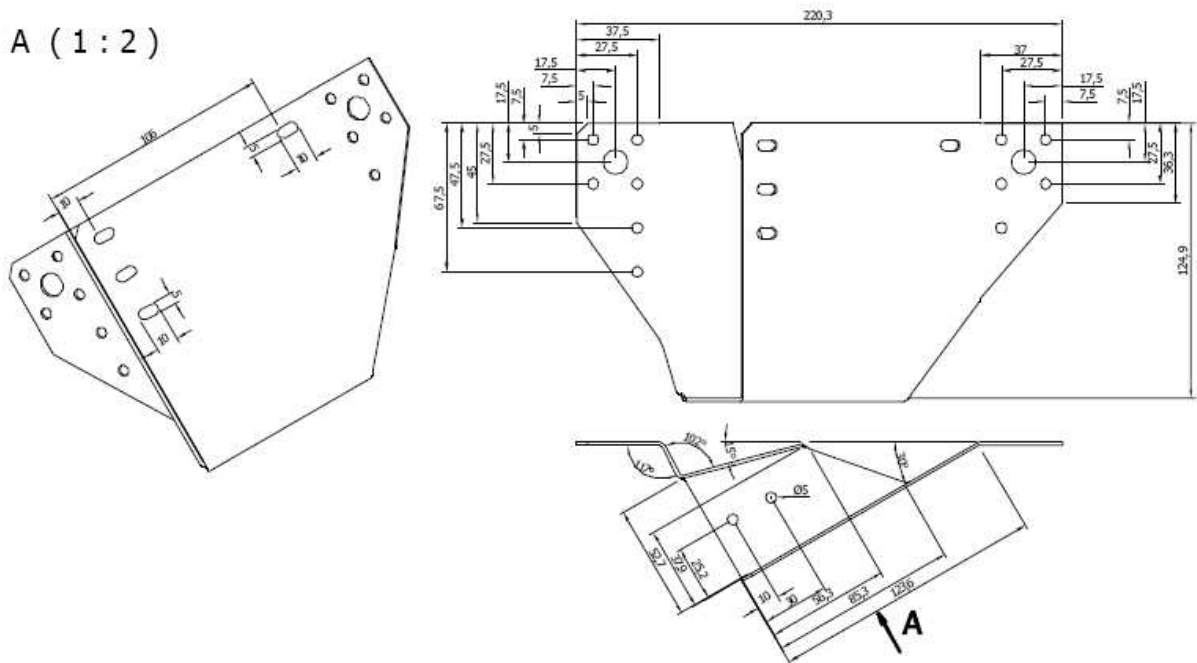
Dimensioned drawing of skewed hanger S1530G/38/1.5
